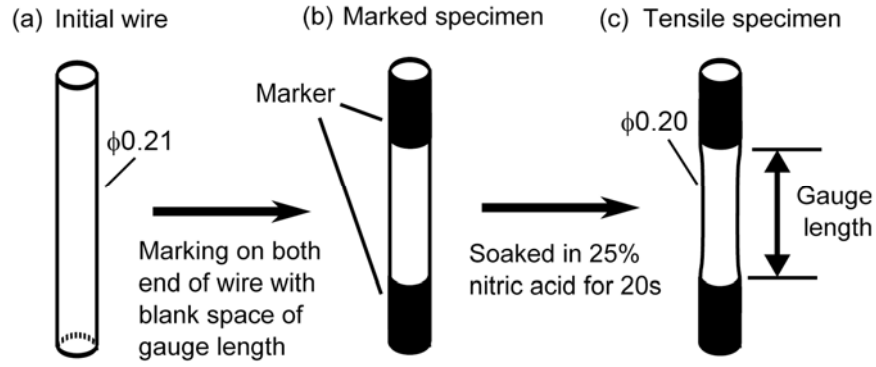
Schematic illustration showing the tensile specimen preparation. (a) initial wire, (b) specimen marked on both end with blank space of the gauge length, and (c) tensile specimen produced by soaking in 25% nitric acid for 20s.
